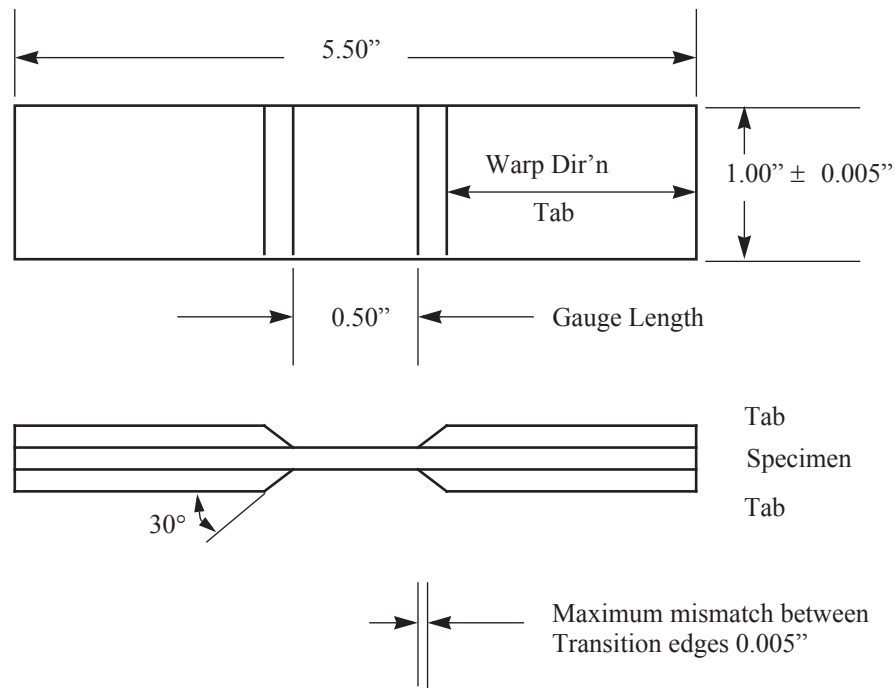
COMPRESSIVE TEST SPECIMEN
